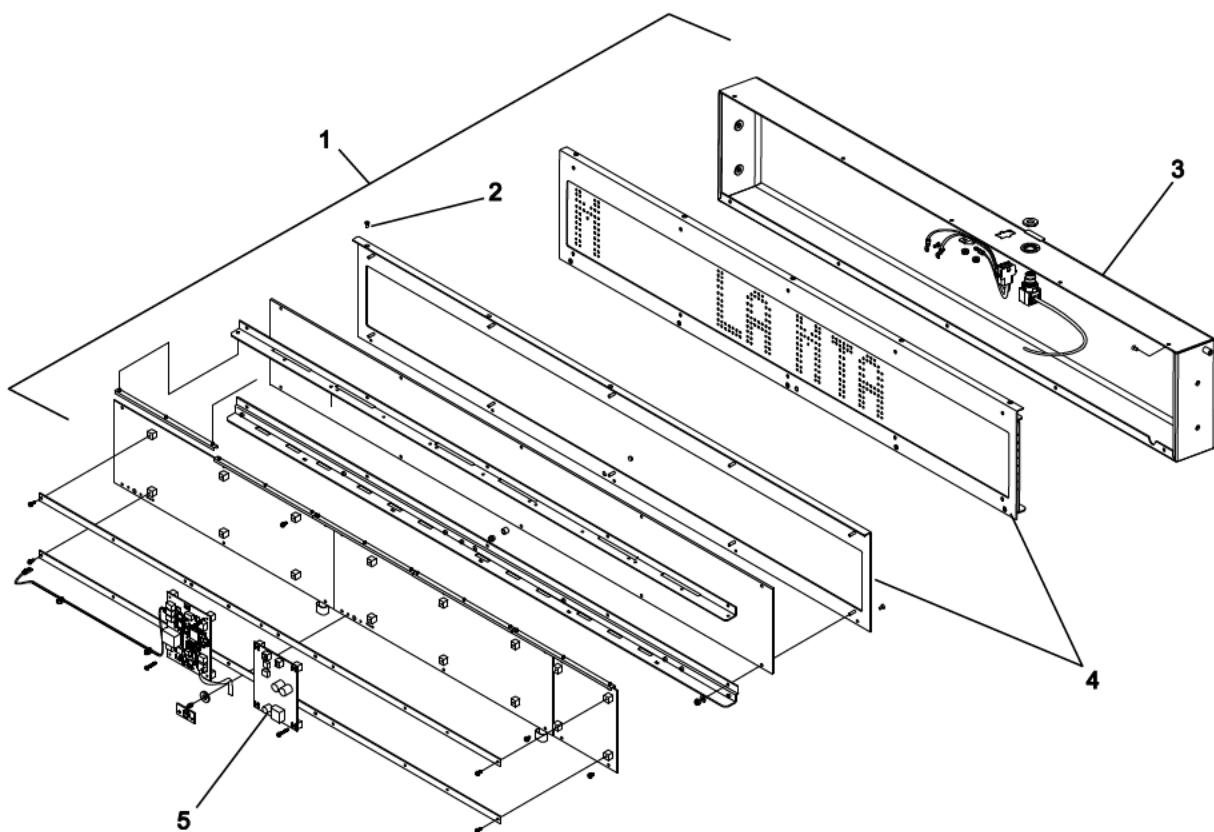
Replace Side Destination Sign Power Supply PCB
